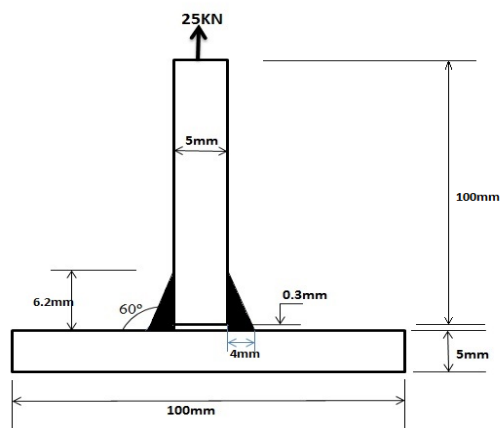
Arc weld of T-joint under tensile load for 0.3mm gap and 60° angle
